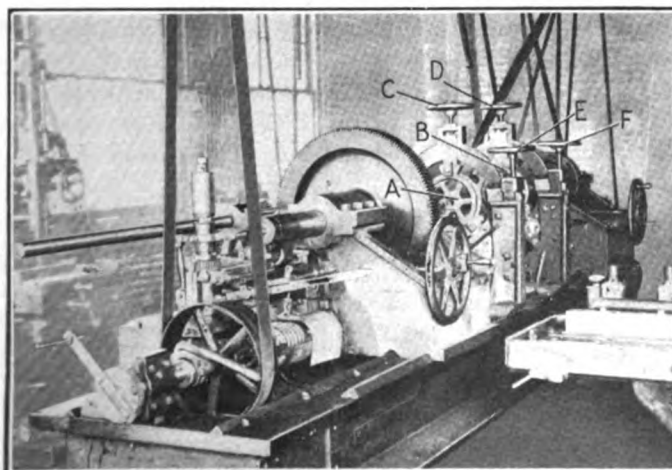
FRONT VIEW OF WHEEL AND AXLE LATHE
